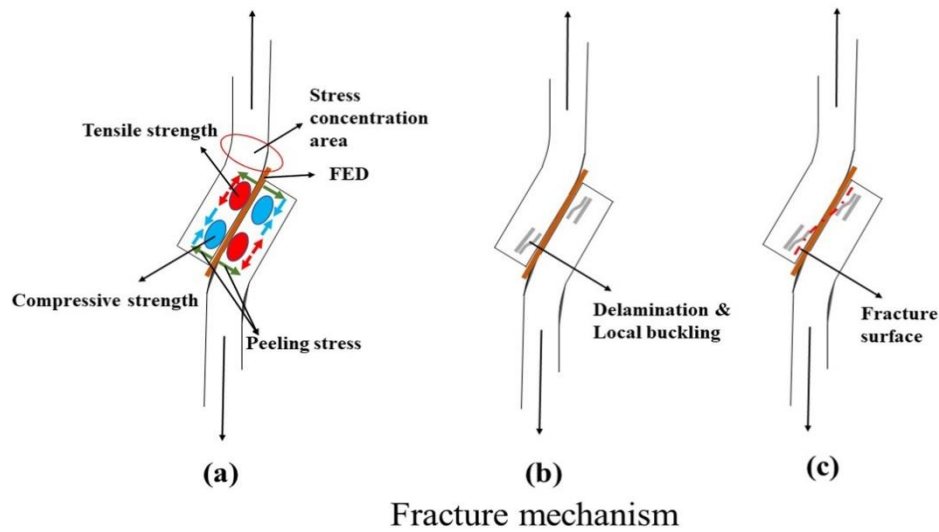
Fracture mechanism of the joints with a flat energy director.
